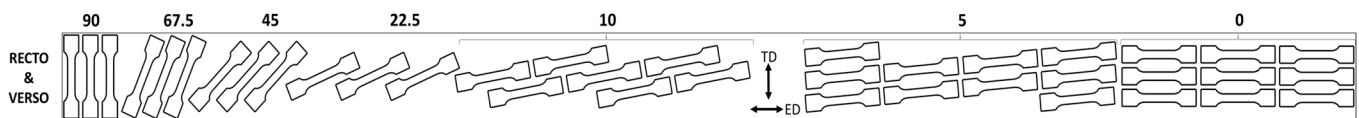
Machining plan of the microtensile specimens from an extruded tubular profile. ED: extrusion direction; TD: transverse direction. Recto and Verso are the larger sides of the extruded tubes.
